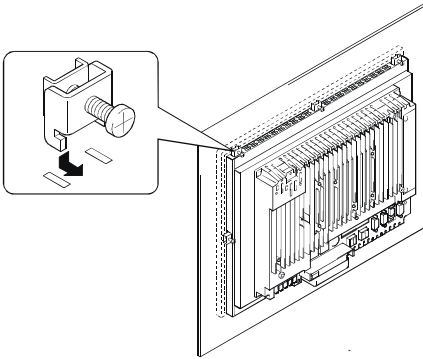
setting the mounting fittings (PT-E831H / PT-E831HS)
